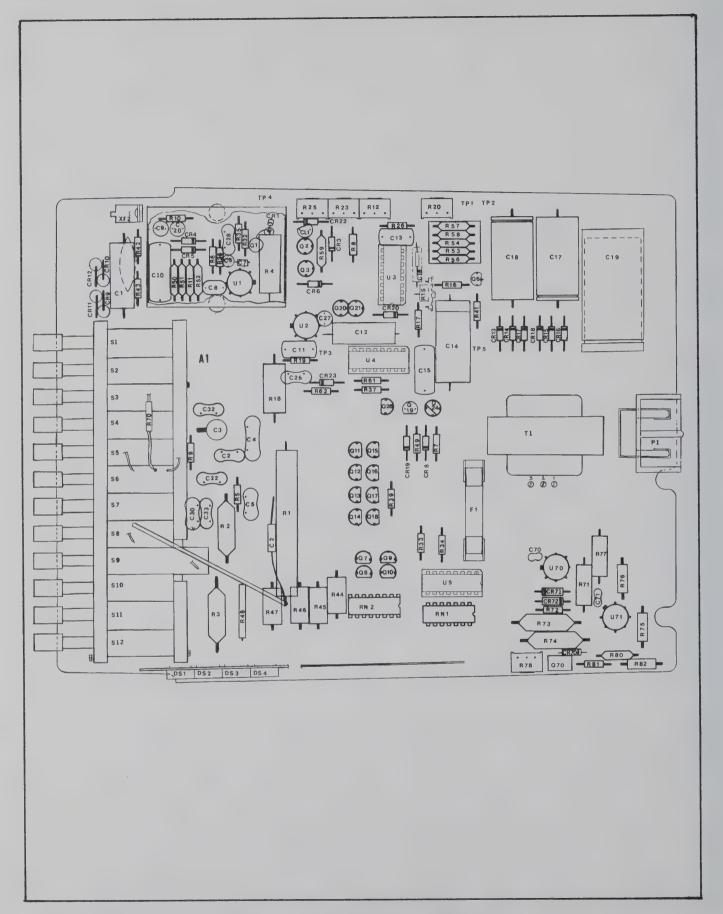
8000A-06 MAIN PCB ASSEMBLY
